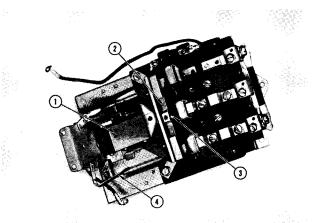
REMOVING SPRING 1. Magnet 2. Spring Support 3. Spring 4. Clips
